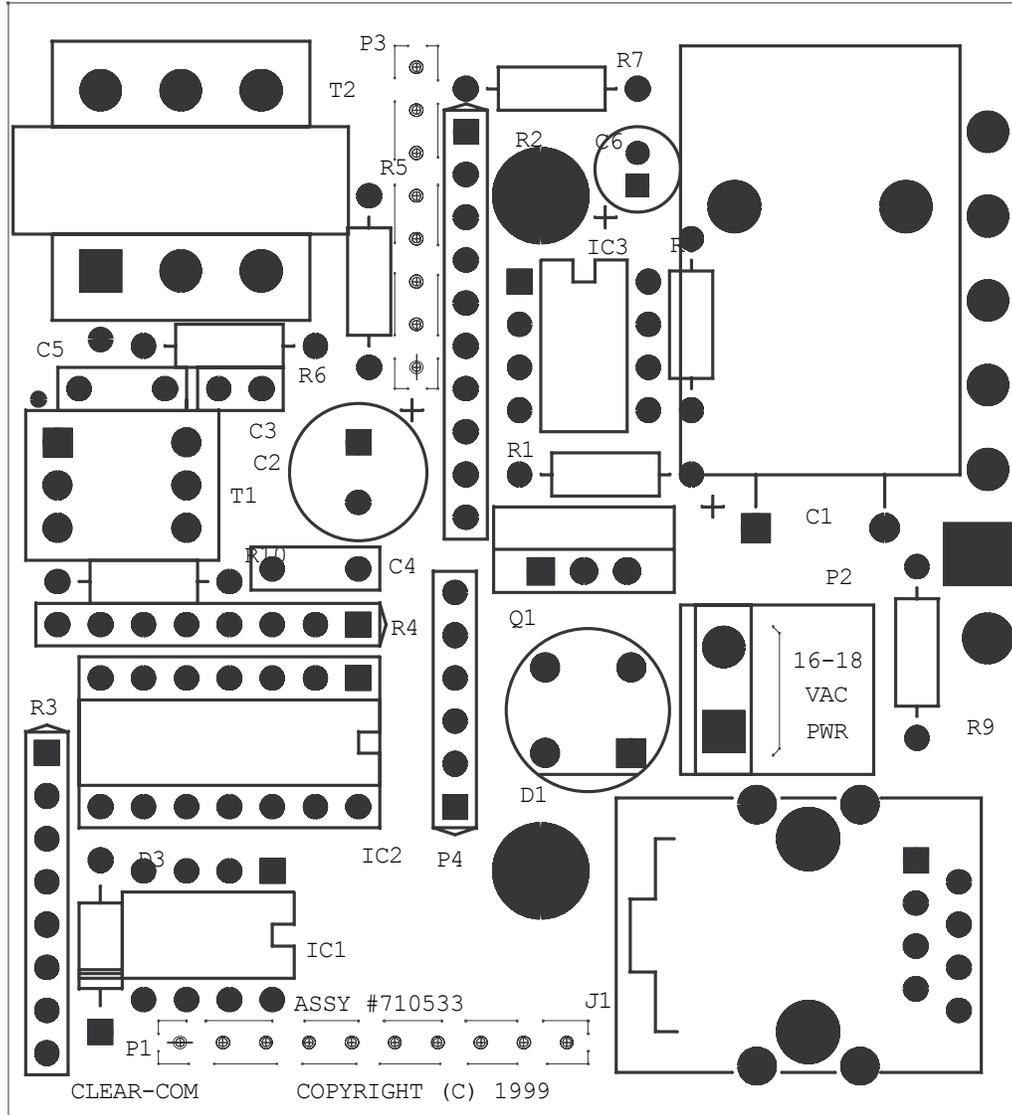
Matrix Option PCB Component Layout (part no. 710533)
